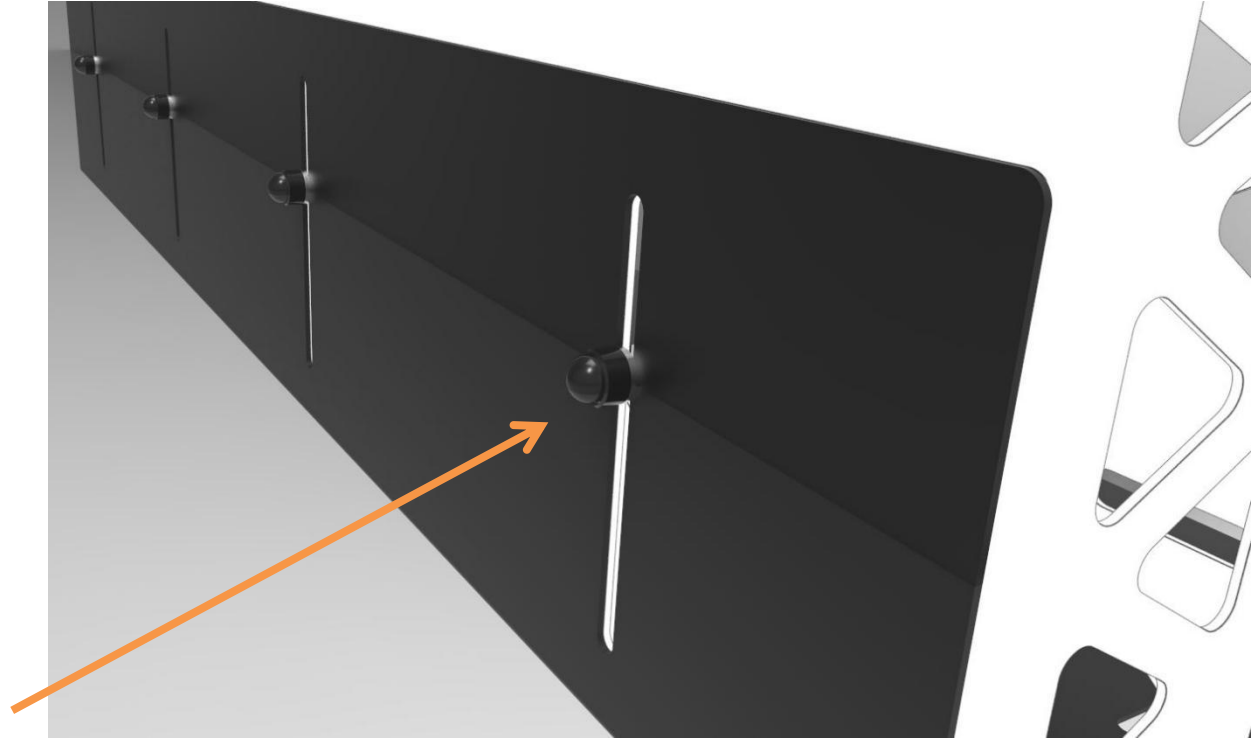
Complete this Shelf Bracket assembly with Nut Caps
